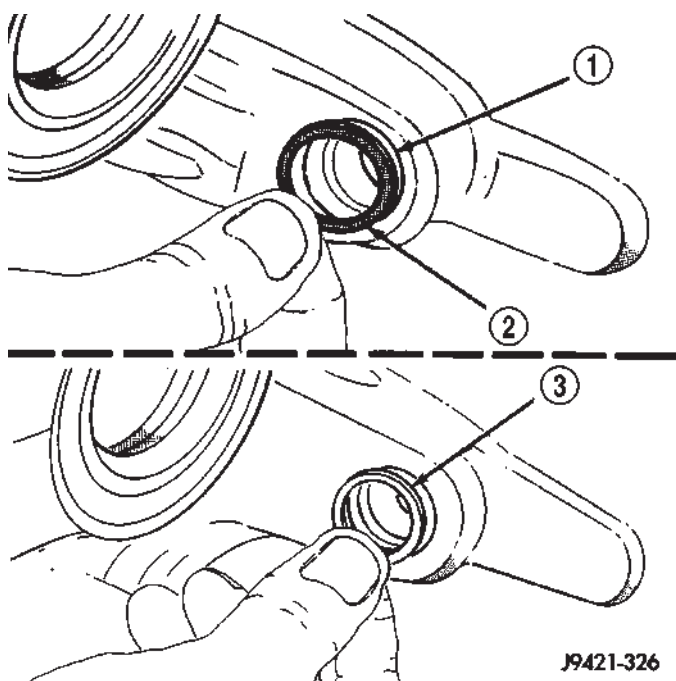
Sector Shaft O-Ring And Retainer Installation
